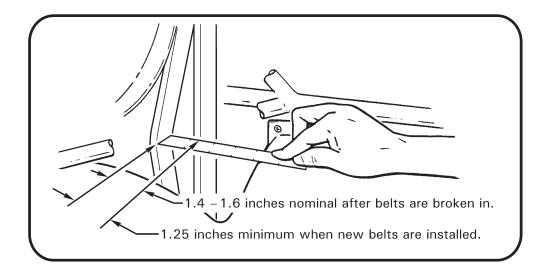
A V-BELT DEFLECTION (ACTUATOR DISENGAGED)
